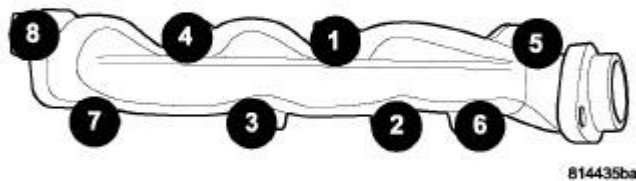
Exhaust Manifold Bolt Tightening Sequence - Left
